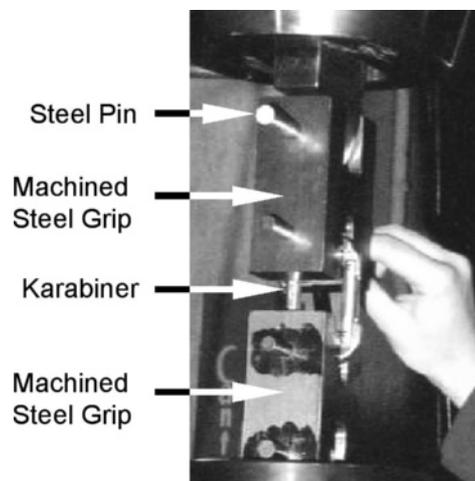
Photograph of test fixture. The fixture meets ASTM specification F 1774
